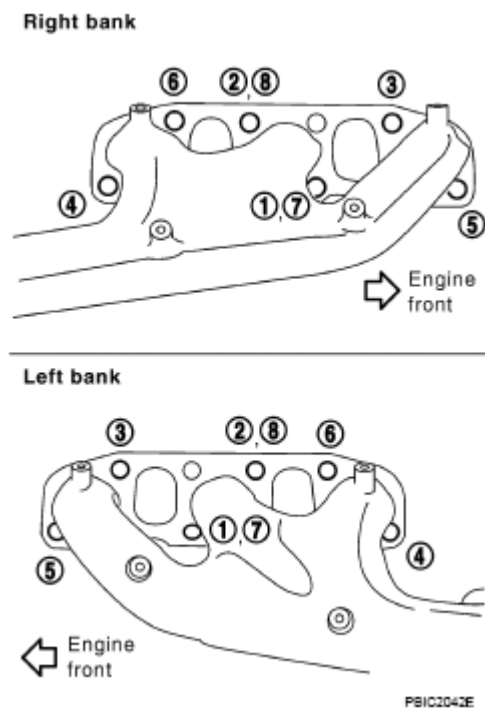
Identifying Exhaust Manifold Nuts Tightening Sequence
